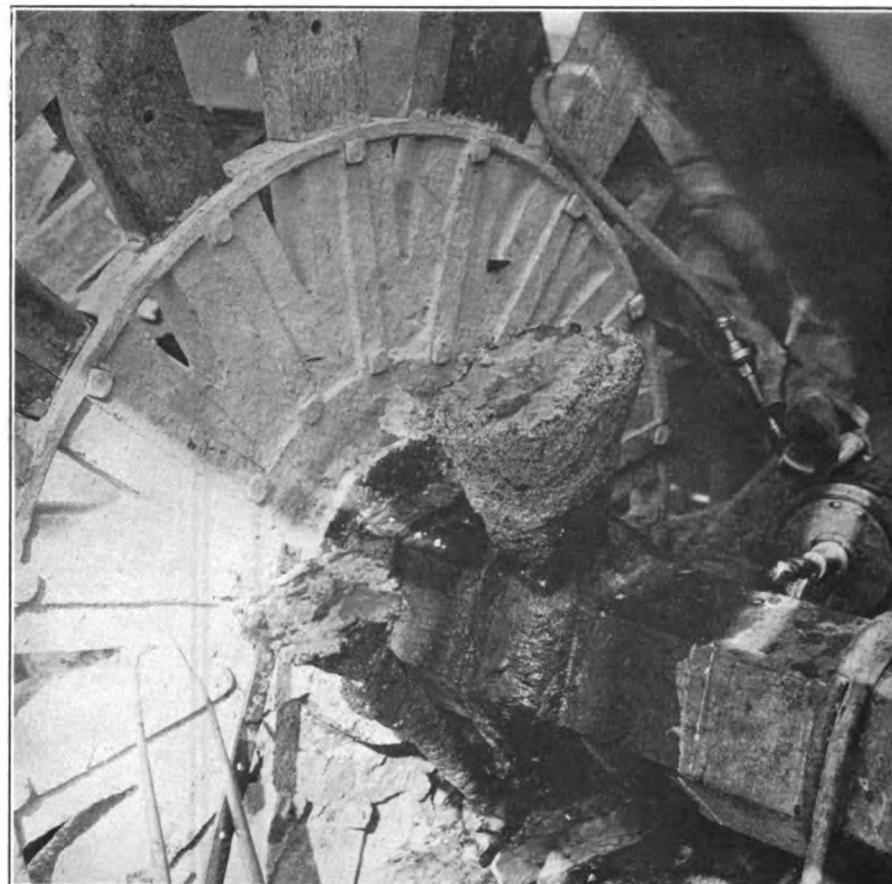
SHOWING THE MOLD STRIPPED AND THE COLLAR AND RISER. THE LATTER IS CUT OFF AFTERWARDS
